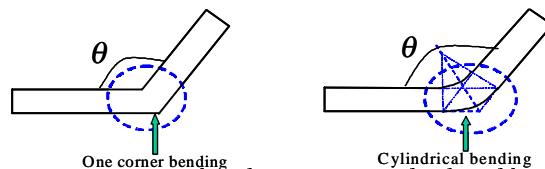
One corner bending Fig.2.2 Cylindrical bending
